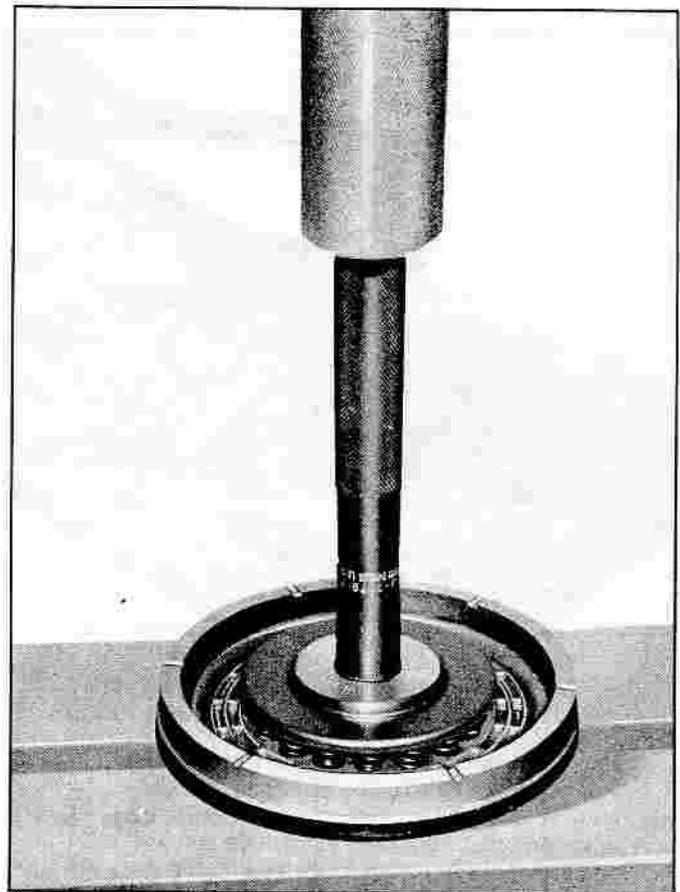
E-42—Installing Rear Pump Body Bushing with J-8360-4 and Handle J-7079-2
